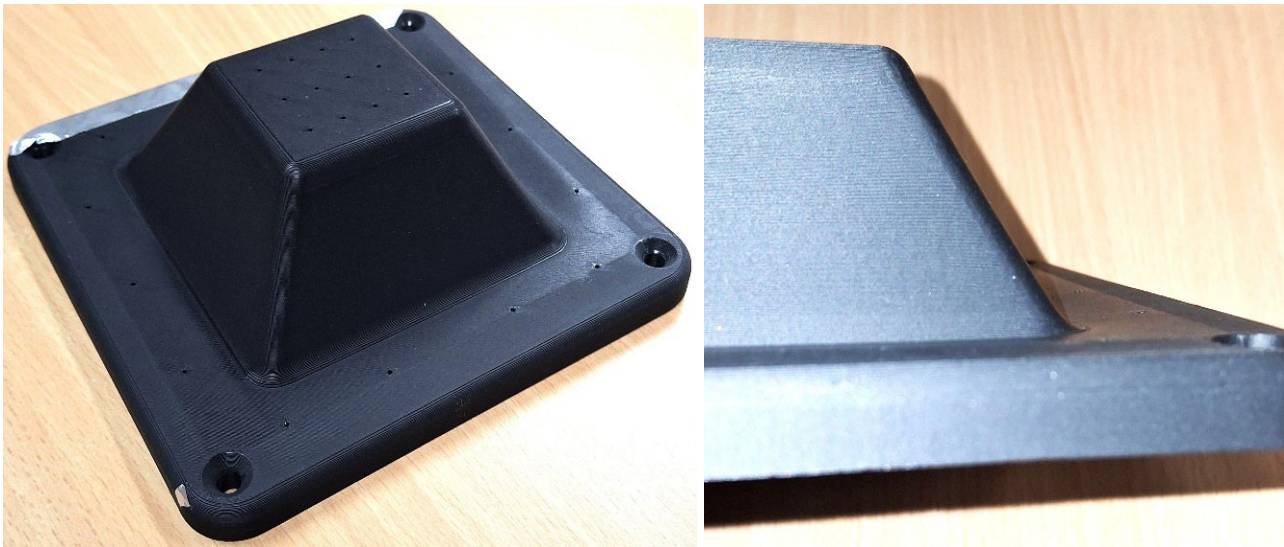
Mould No. 4 after tests, deformation at the mould base.
